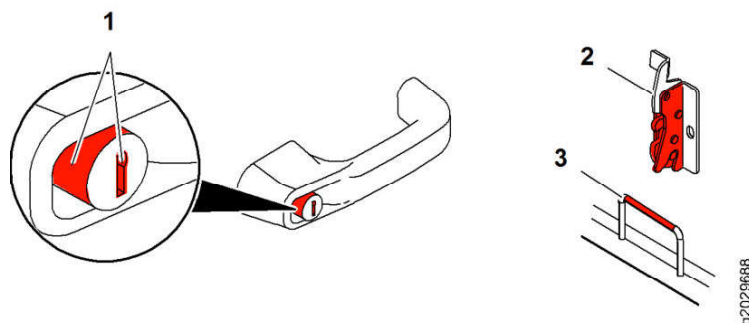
Lubricating the moving parts of the engine bonnet with penetrating oil
